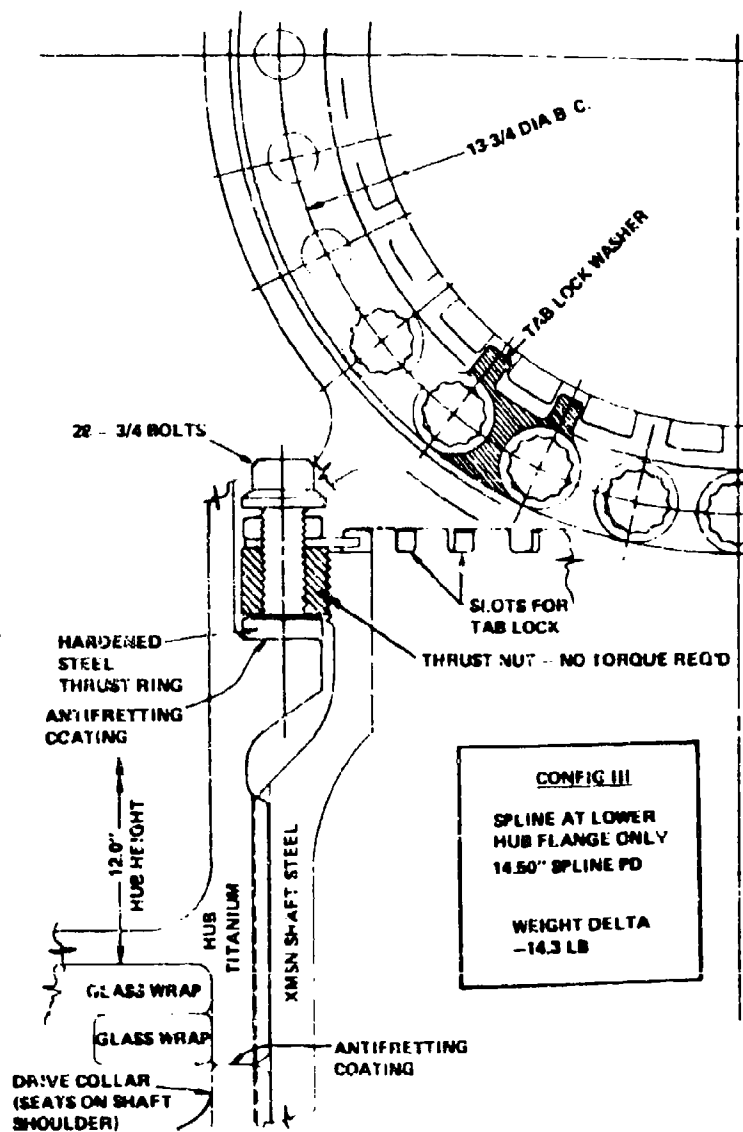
ROTOR HUB/SHAFT ATTACHMENTS
